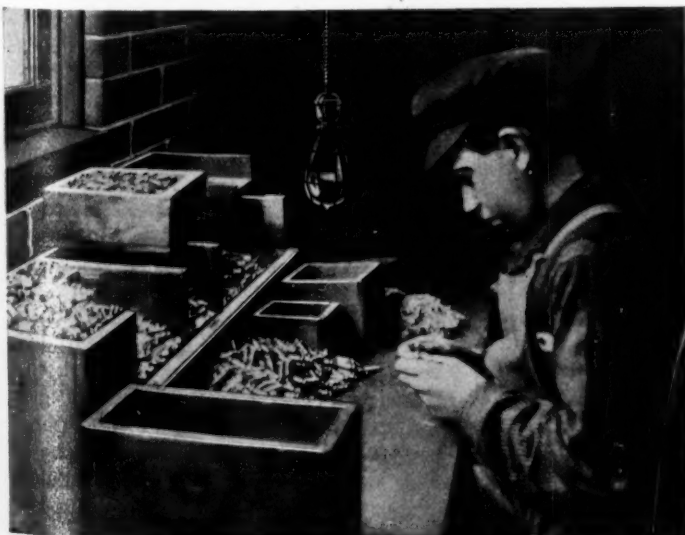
SORTING BEARING PARTS AFTER FIRST GRINDING
